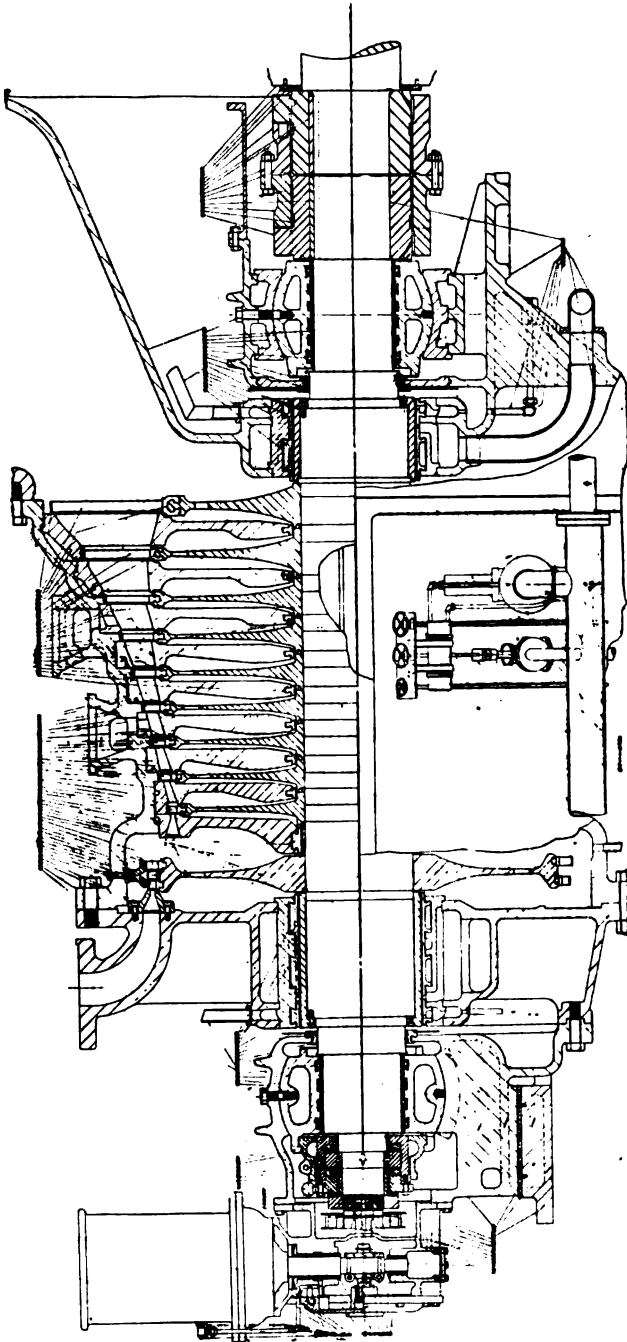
CROSS SECTION OF MAIN TURBINE.
